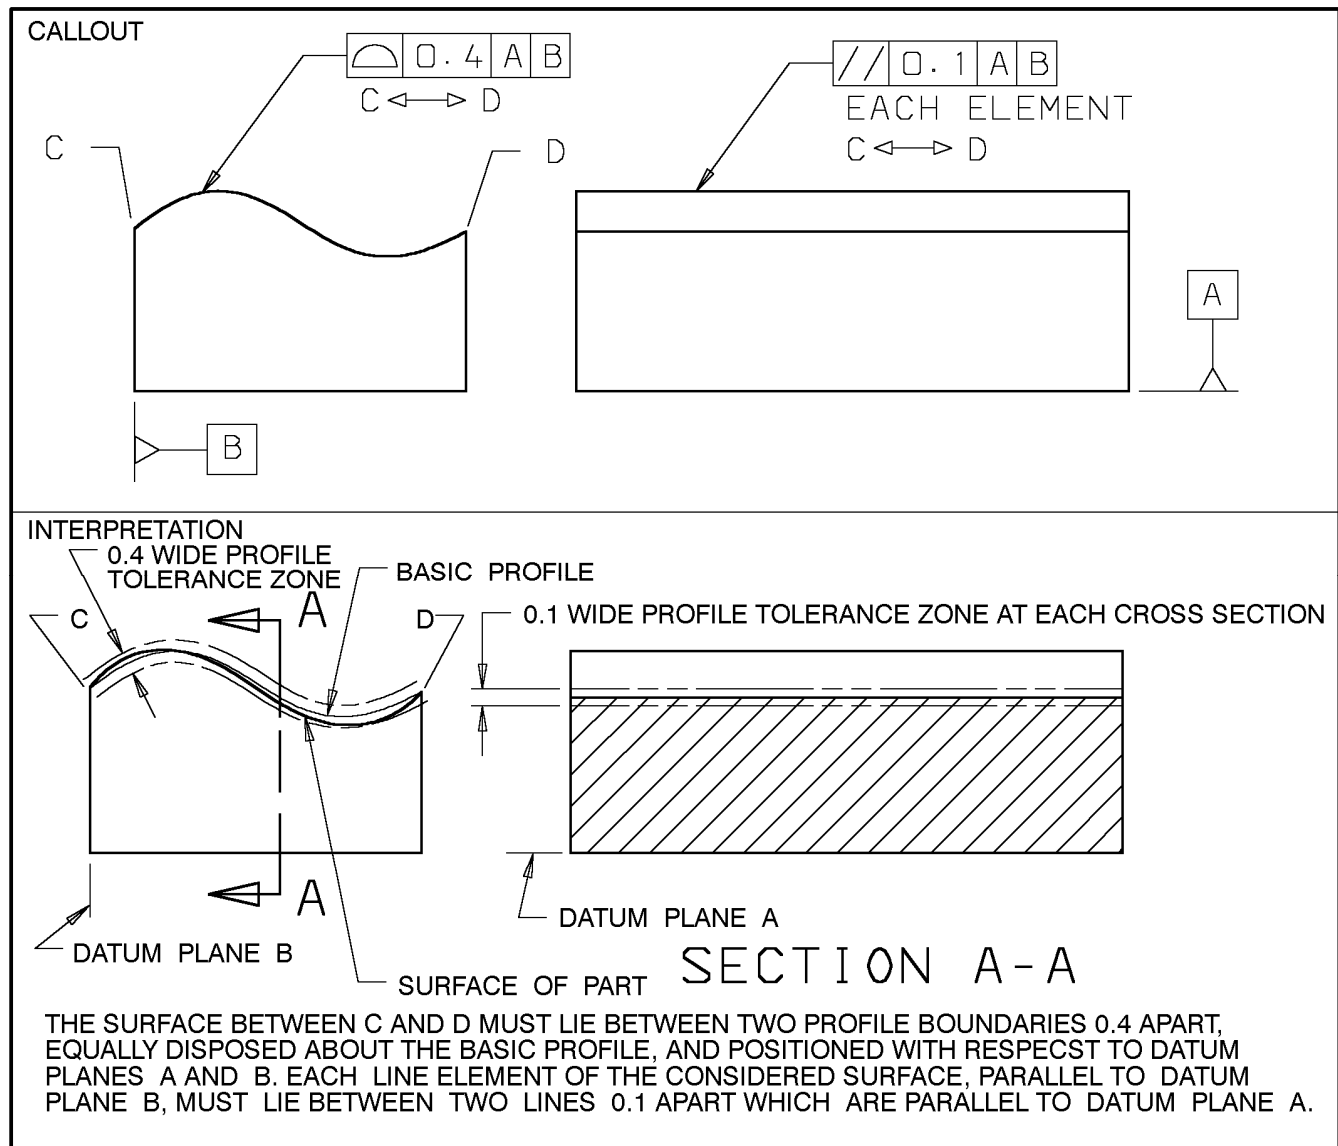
Combined Profile Of A Surface And Parallelism Tolerance
